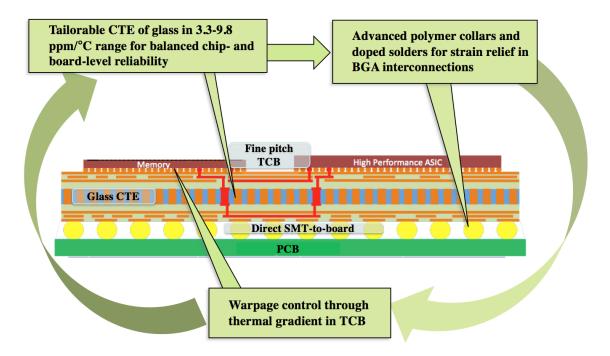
Unique approach for balanced- chip and- board-level reliability of a large, 2.5D glass package with direct SMT-to-board.
